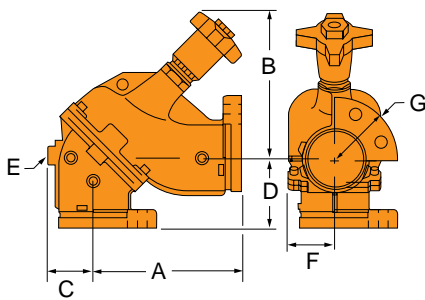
FIGURE GBV-A GROOVED-END ANGLE BALANCING VALVES
